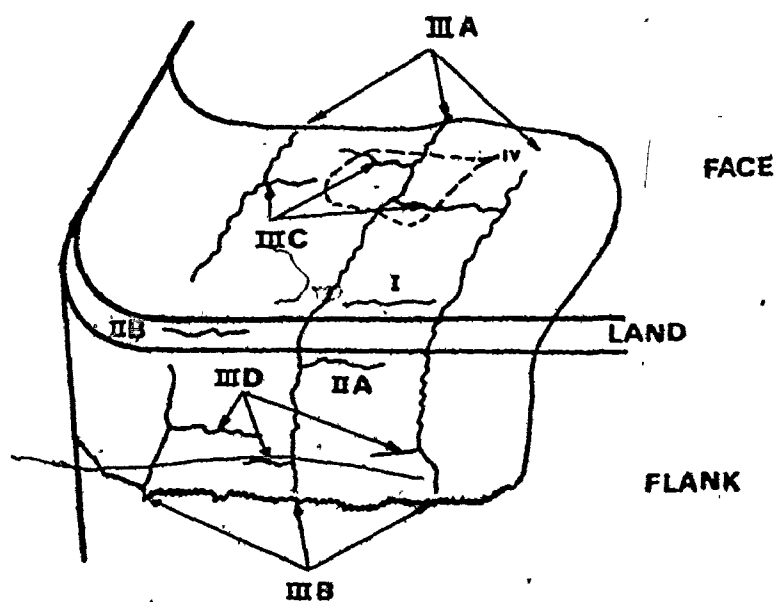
Typical Location and Appearance of Various Types of Fatigue Cracks.
